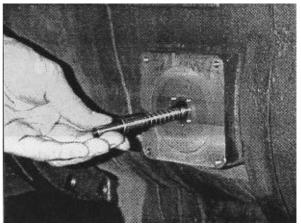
Removing the Position Detector Fig. 4-24 Removing the Sensor Rod Assembly
